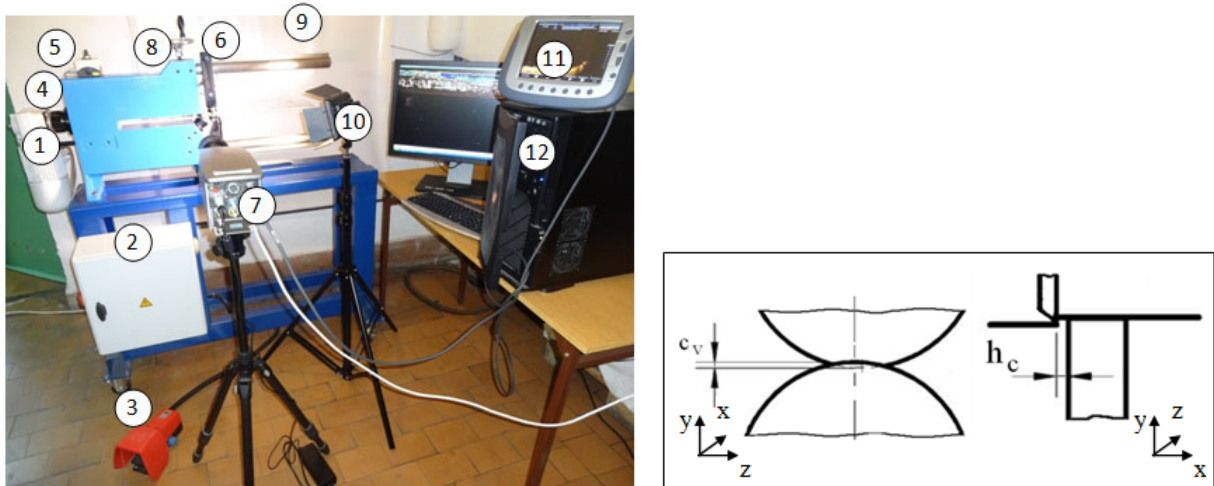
Experimental test stand for thin sheets cutting: 1 – engine, 2 – electrical system, 3 – drive pedal, 4 – threaded socket with a scale for adjusting the cutting clearance, 5 – cutting speed regulator, 6 – sheet stabiliser (needle), 7 – high-speed camera, 8 – knife overlap regulator, 9 – scale for determining the diameter of cut discs for curvilinear outlines, 10 – LED lamp, 11 – auxiliary screen for recording and analysis, 12 – computer workstation for archiving measurement data
